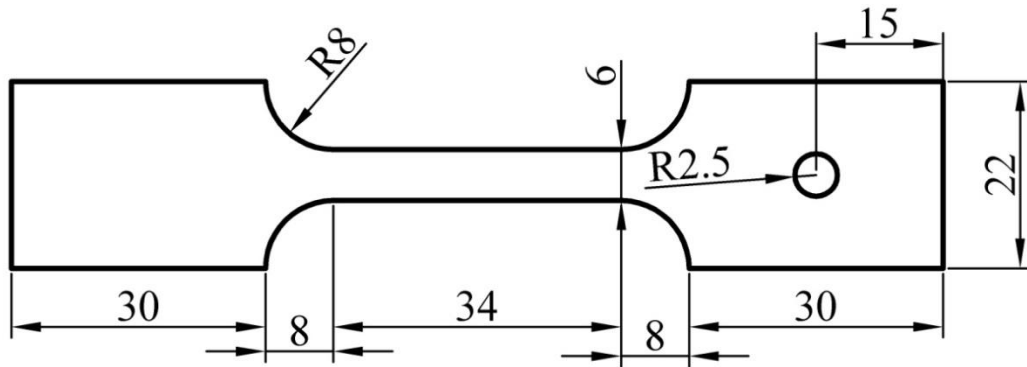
Typical dimensions (in mm) of coupon specimen for post-fire tensile coupon test
